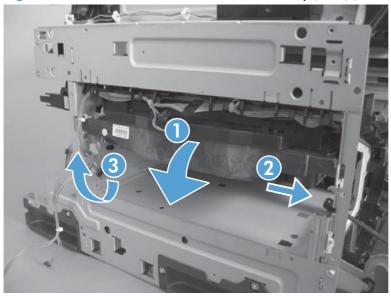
Remove the laser/scanner assembly (Y/M) (3 of 5)
